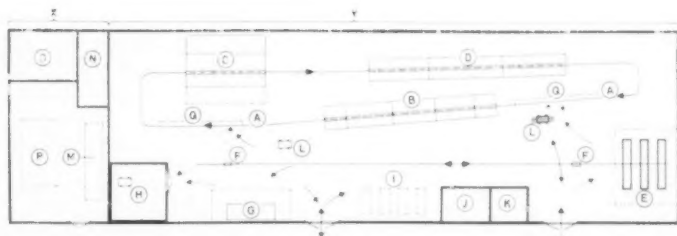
Layout of a paint shop for electrical switchgear : (A) Overhead conveyor ; (B) Pressure blast tunnel (surface cleaning, pretreatment) ; (C) Continuous paint spraying line ; (D) Enamel stoving tunnel ; (E) Rust removal installation ; (F) Electric hoist ; (G) Paint spraying station for large components ; (H) Drying chamber for large components ; (I) Filling and rubbing-down stations ; (J) Foreman's office ; (K) Carrier trucks ; (L) Air compressors ; (M) Fresh-air plant ; (N) Waste-water cleansing tank ; (O) Hot-water boiler plant ; (P) Conveyor control stations ; (Q) auxiliary lines. (Layout plan by author).
